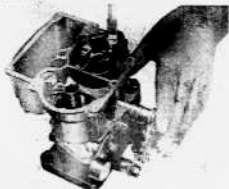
Removing Primary V0574 Main Air Bleeder
